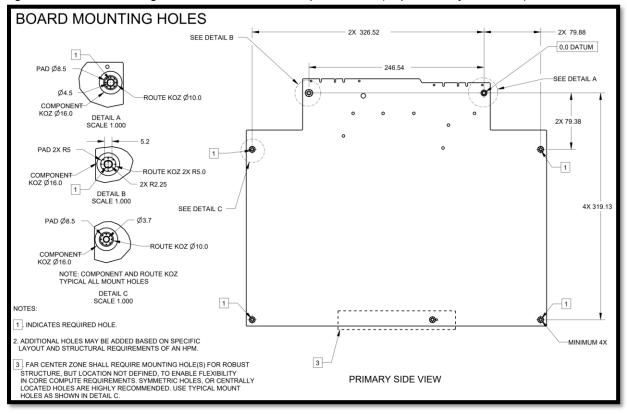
Board Mounting Holes with Pads and Keepout Zones (Top / Primary side view)
